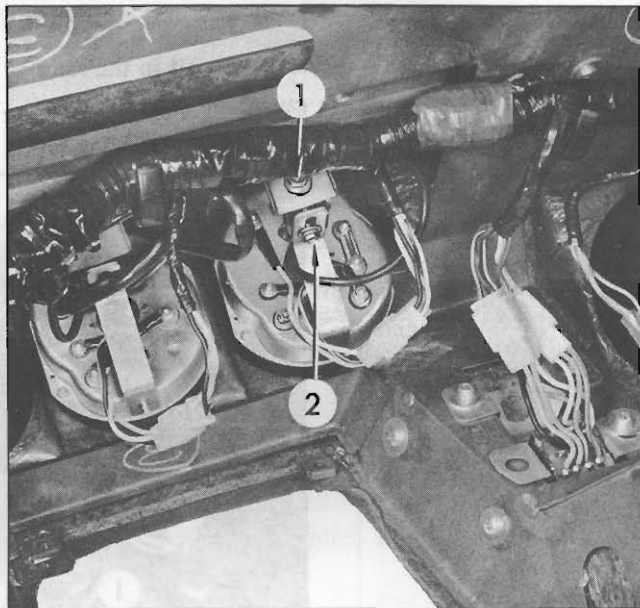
Removing water temperature gauge and oil pressure gauge
